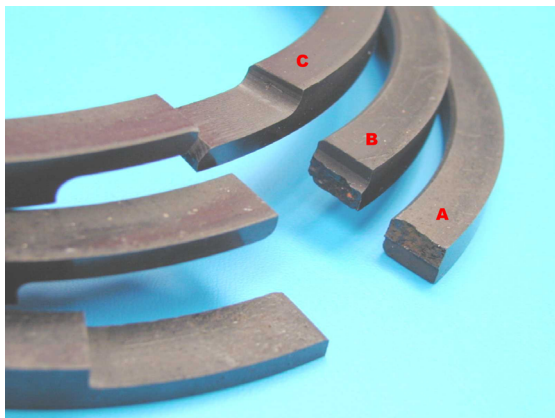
Avoidance of failure by fracture through a large radius at the transition to the step-cut joint ( $A = 1 \text{ mm}$ ,  $B = 2 \text{ mm}$ ,  $C = 4 \text{ mm}$ )
